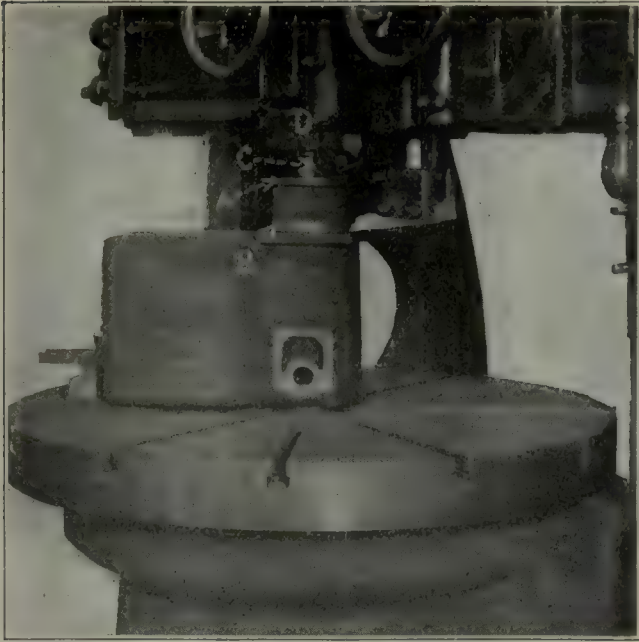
TURNING OUTSIDE FLANGES OF CYLINDER
